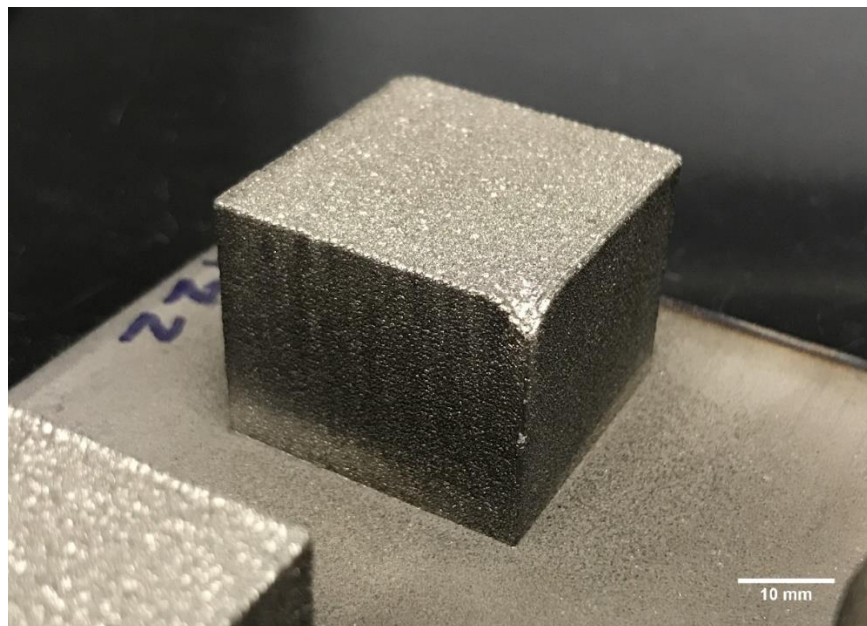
Build showing defect of slanted corner as the result of misaligned nozzles with the laser beam.
